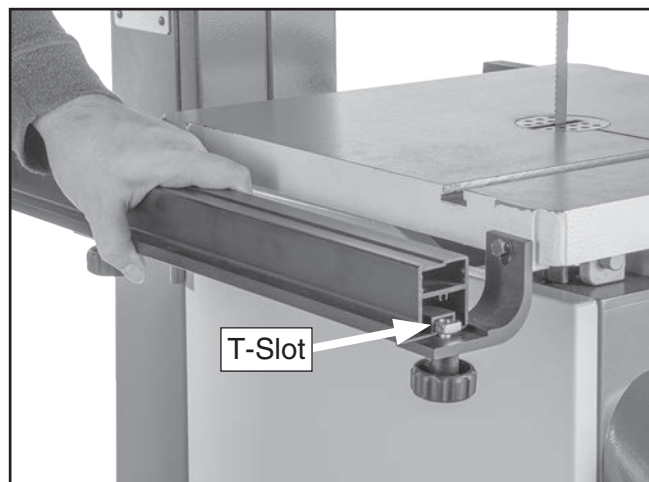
Knob bolts and square nuts installed on front rail mounting brackets.
